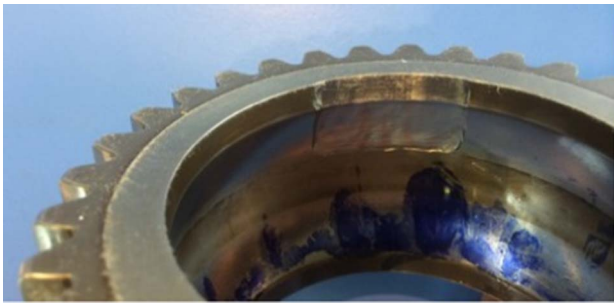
A demonstration of seeded major bearing defect in test case 2 [19].
